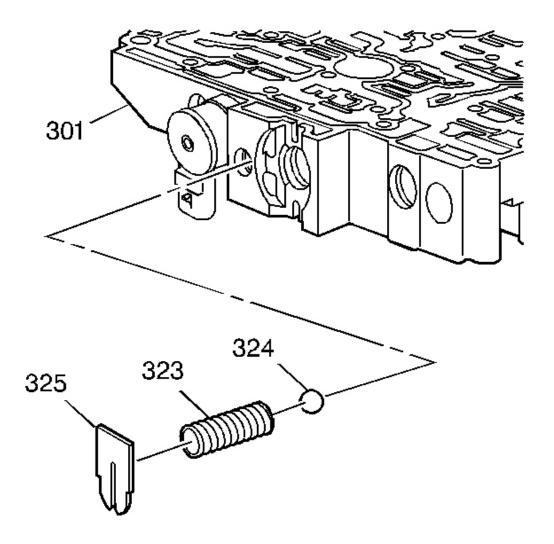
Locating Line Pressure Relief Valve Assembly Courtesy of GENERAL MOTORS CORP.
